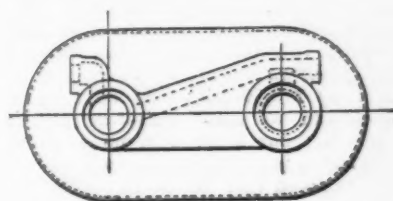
Plan of Steam Inlet and Exhaust Ports.
